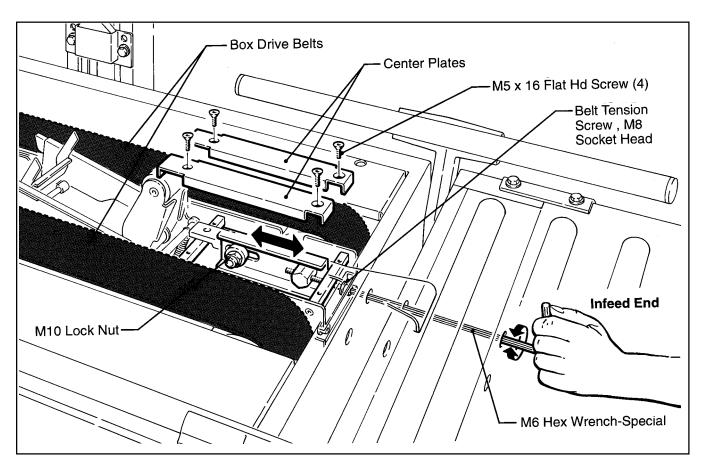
Box Drive Belt Tension Adjustment, Lower Belts (Infeed End)
